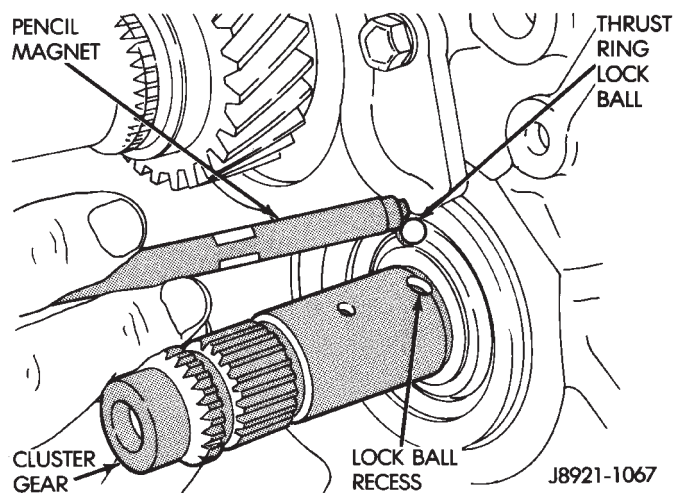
Install Fifth Gear Thrust Ring Lock Ball
